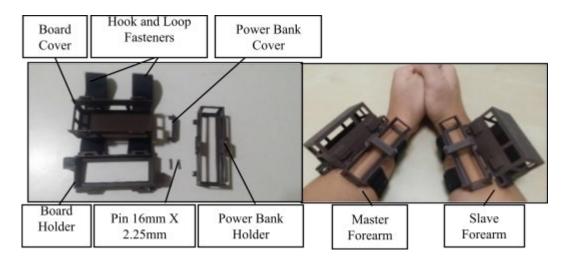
(b): System holder fabricated parts (left) and system holder assembly on master and slave forearms (right).
